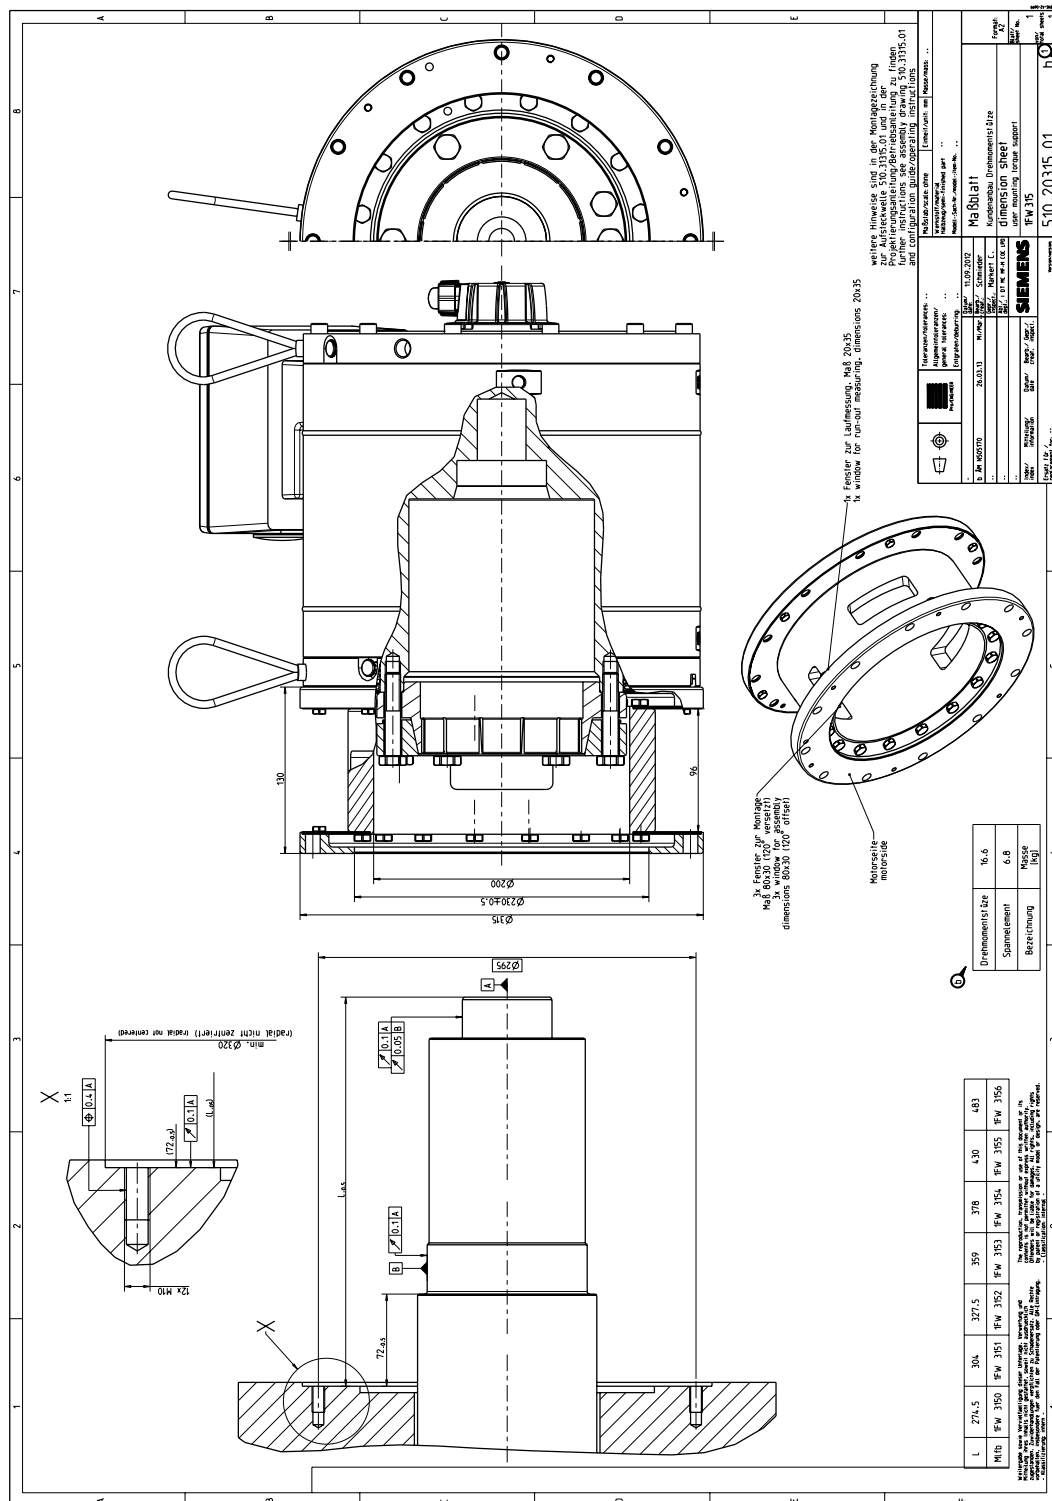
1FW3150 Siemens torque arm, dimension drawing 510.20315.01
